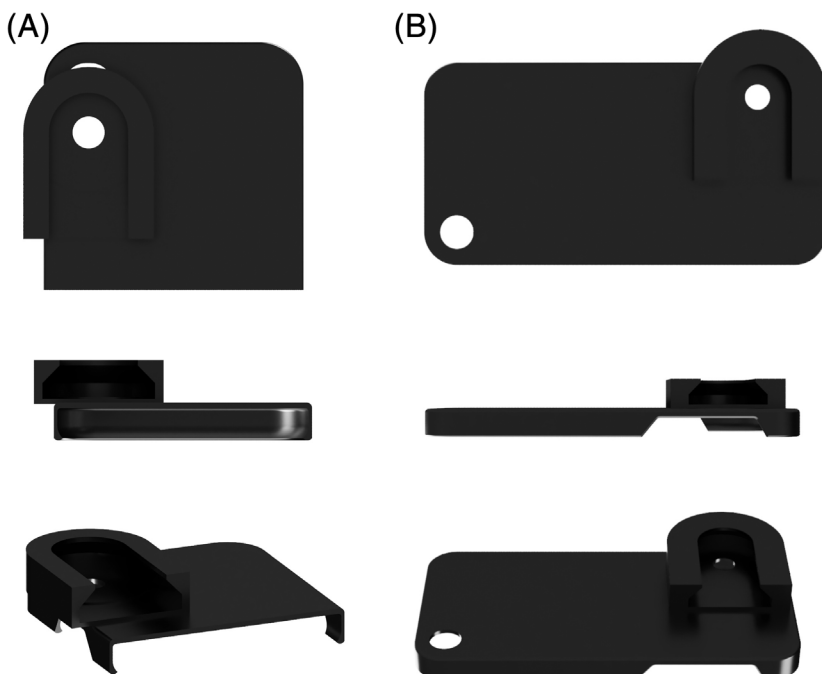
A, Initial prototype CAD drawing of the adaptor. B, Final CAD drawing of the adaptor. CAD, computer aided design
